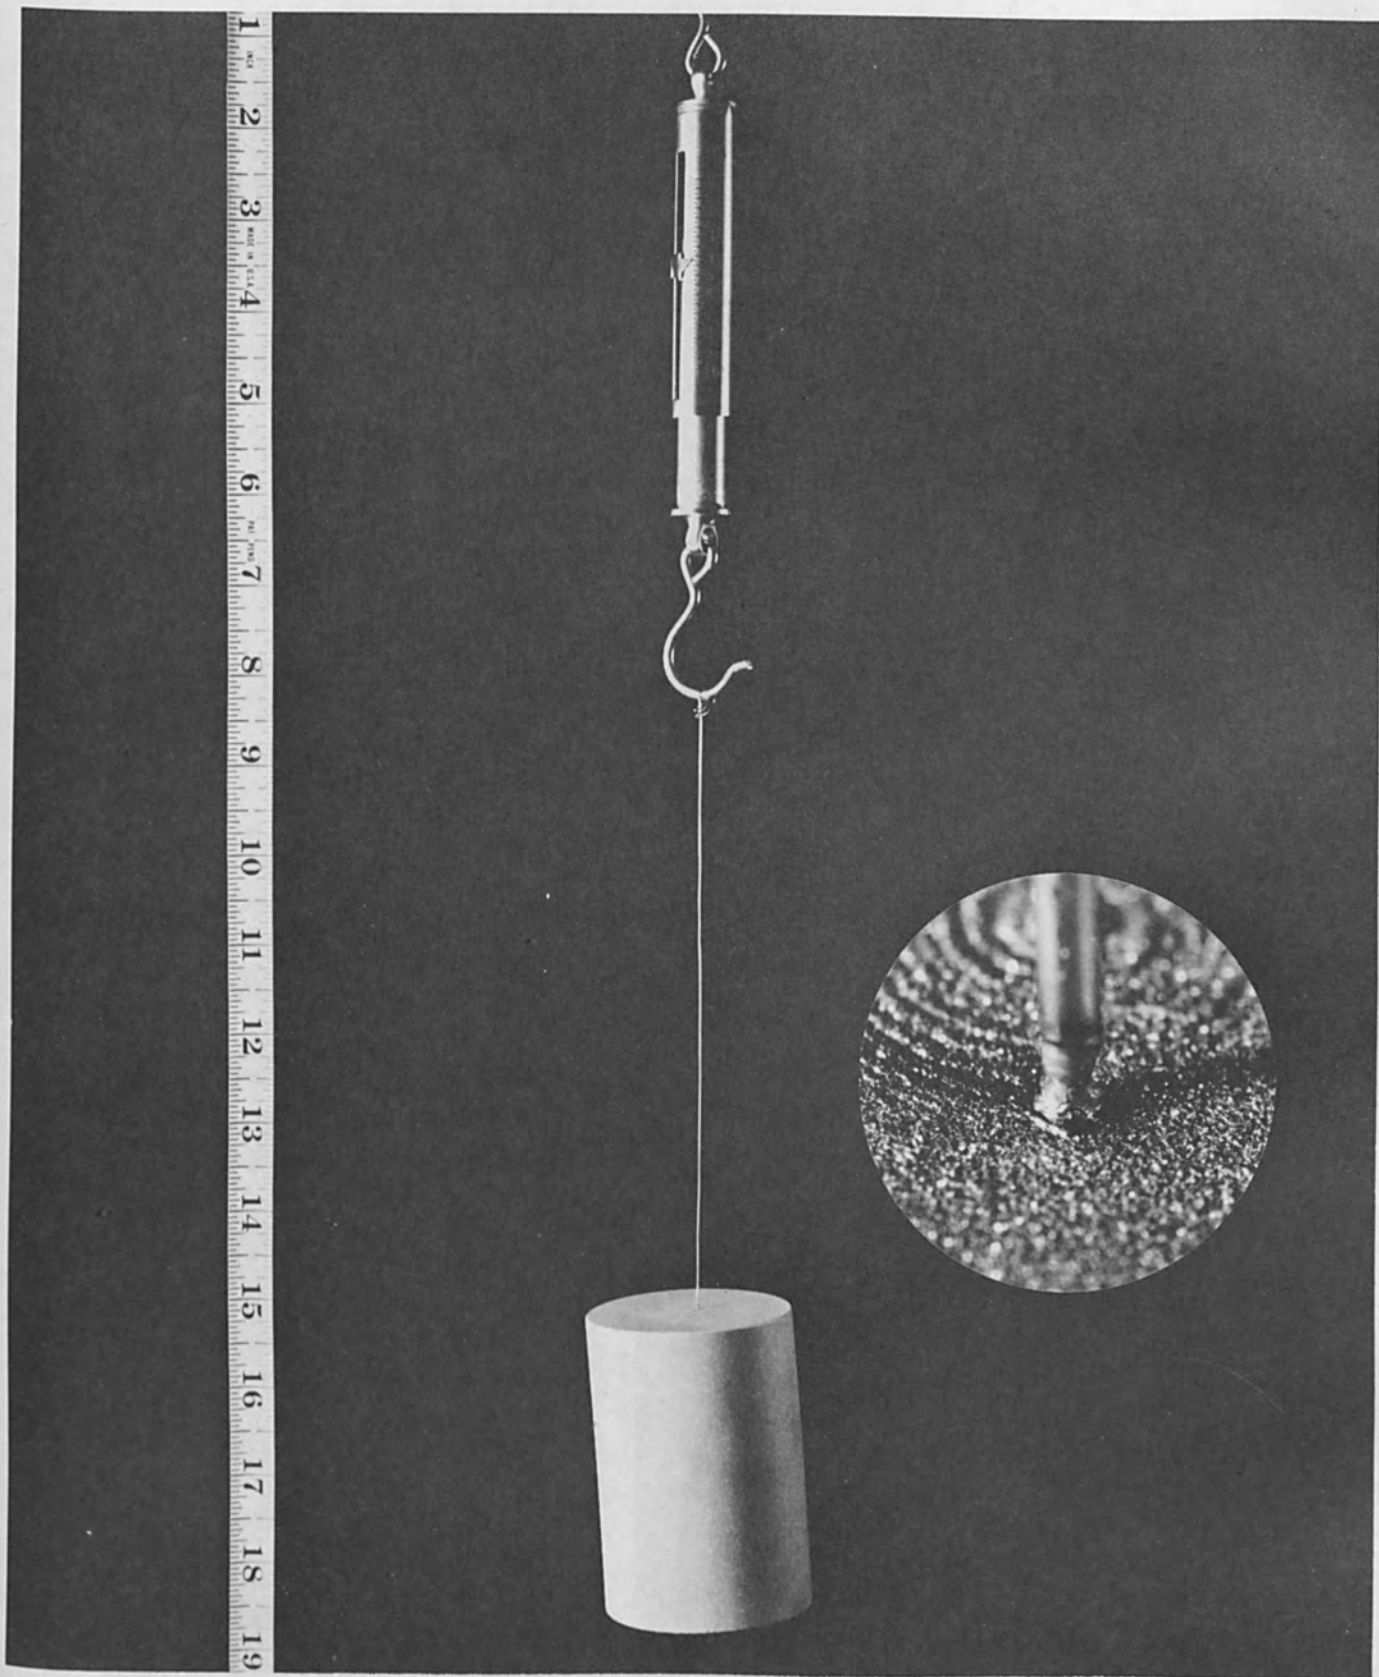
Laser weld of 0.020-inch-diameter nickel wire to a four pound copper cylinder.
